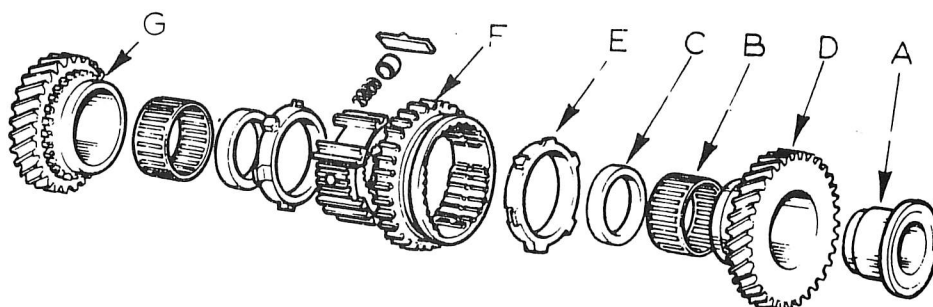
1st. AND 2nd. GEAR ASSEMBLIES
